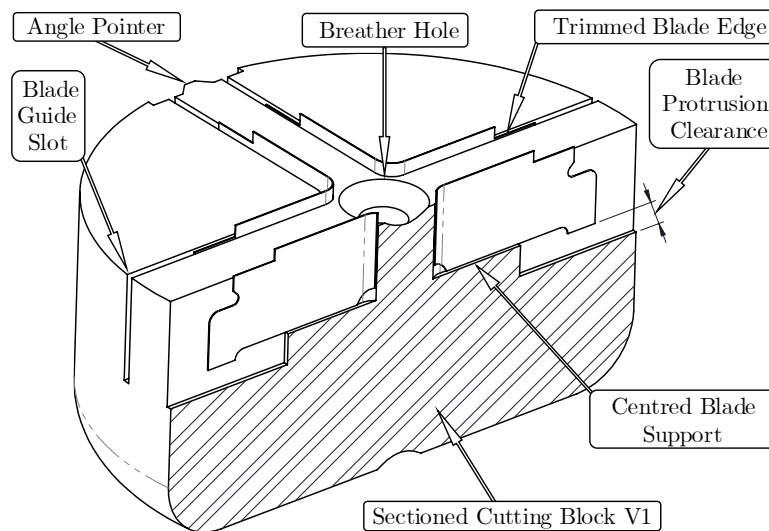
Improved cutting block with the internal blade support & trimming
